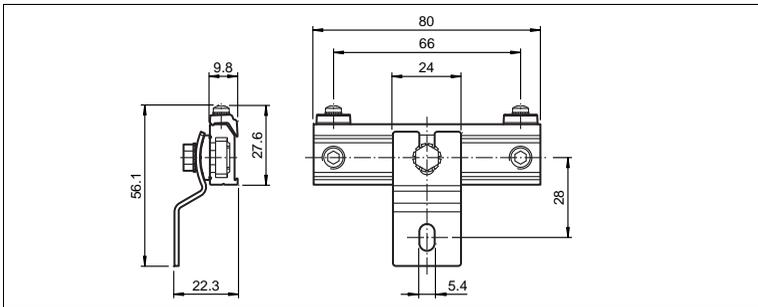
Mounting aid OMH-SLCT-03 (fixed bearing)
